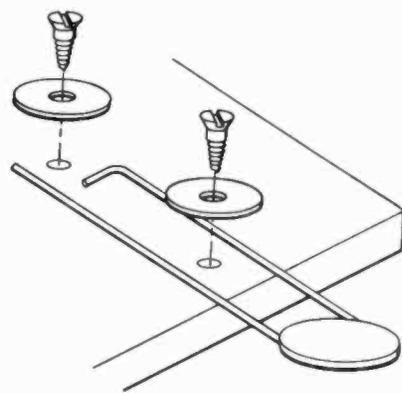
TWO WASHERS AND WOOD SCREWS on 1/2-inch centers hold key springs in place.
